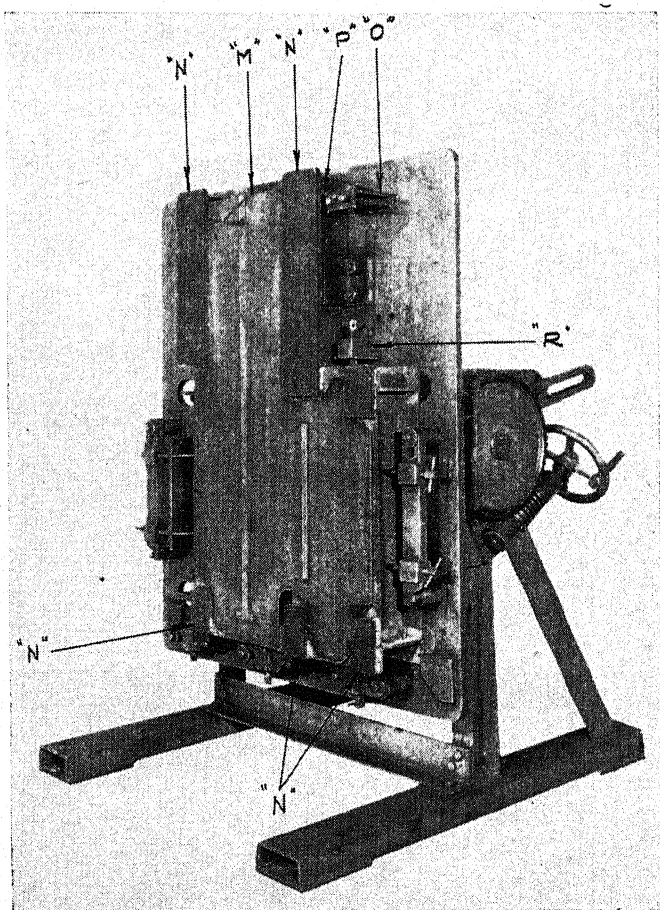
Locating template "M" locates pads "N" for tack welding.
